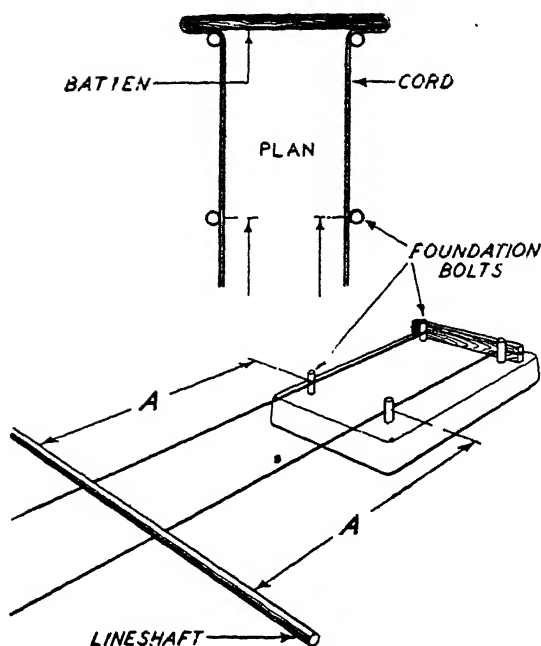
USING A LINING-UP CORD FOR ALIGNING BELT, ROPE, CHAIN, OR GEAR DRIVE
